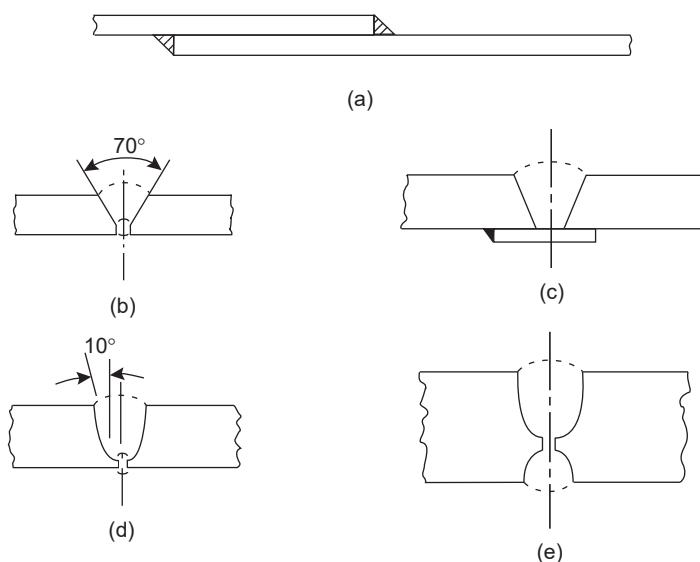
Weld profiles (b to e) butt welds. (a) Lap joint. (b) Single "V." (c) Backing strip. (d) Single "U." (e) Double "U."
